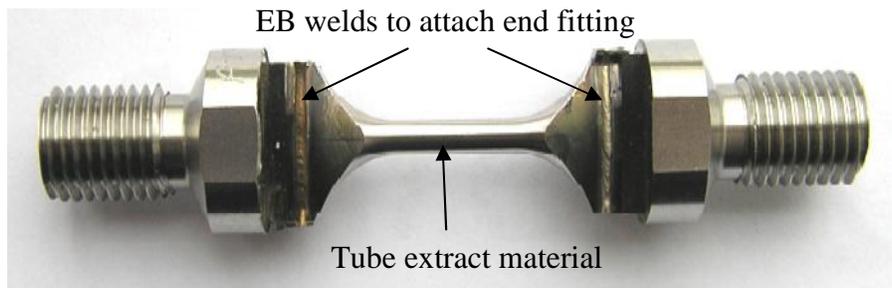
Tube extract test specimen after final machining, showing the location of the EB welds to attach end fittings.
